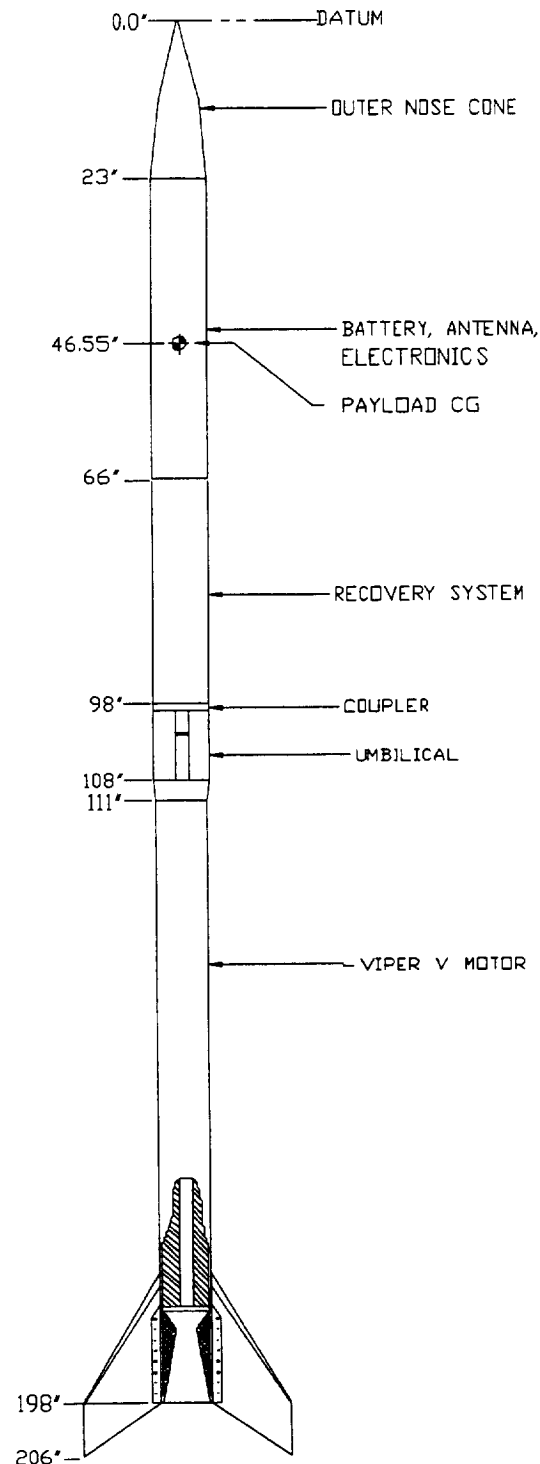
Design specifications and dimensions for the Viper V sounding rocket vehicle. Note, motor and nozzle cutaway, in addition to basic fin geometry.
